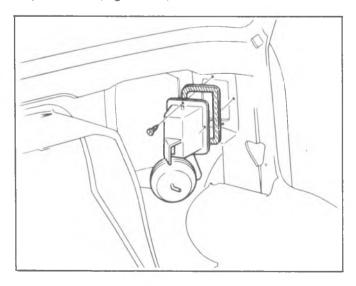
B-56-Air Inlet Valve (G Model C60 System)
